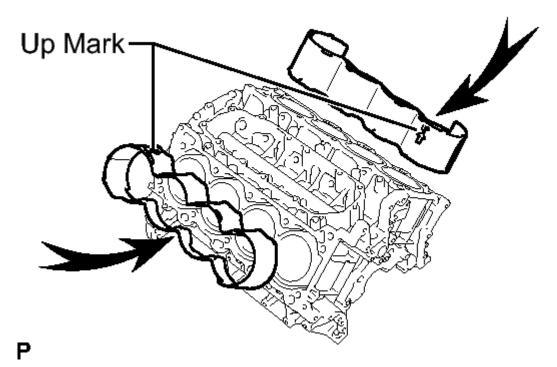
Identifying Cylinder Block Water Jacket Spacer
